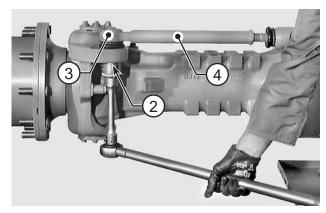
Loosen the check nuts (2) on the joints (3) of the steering bars (4). Remove nuts.
